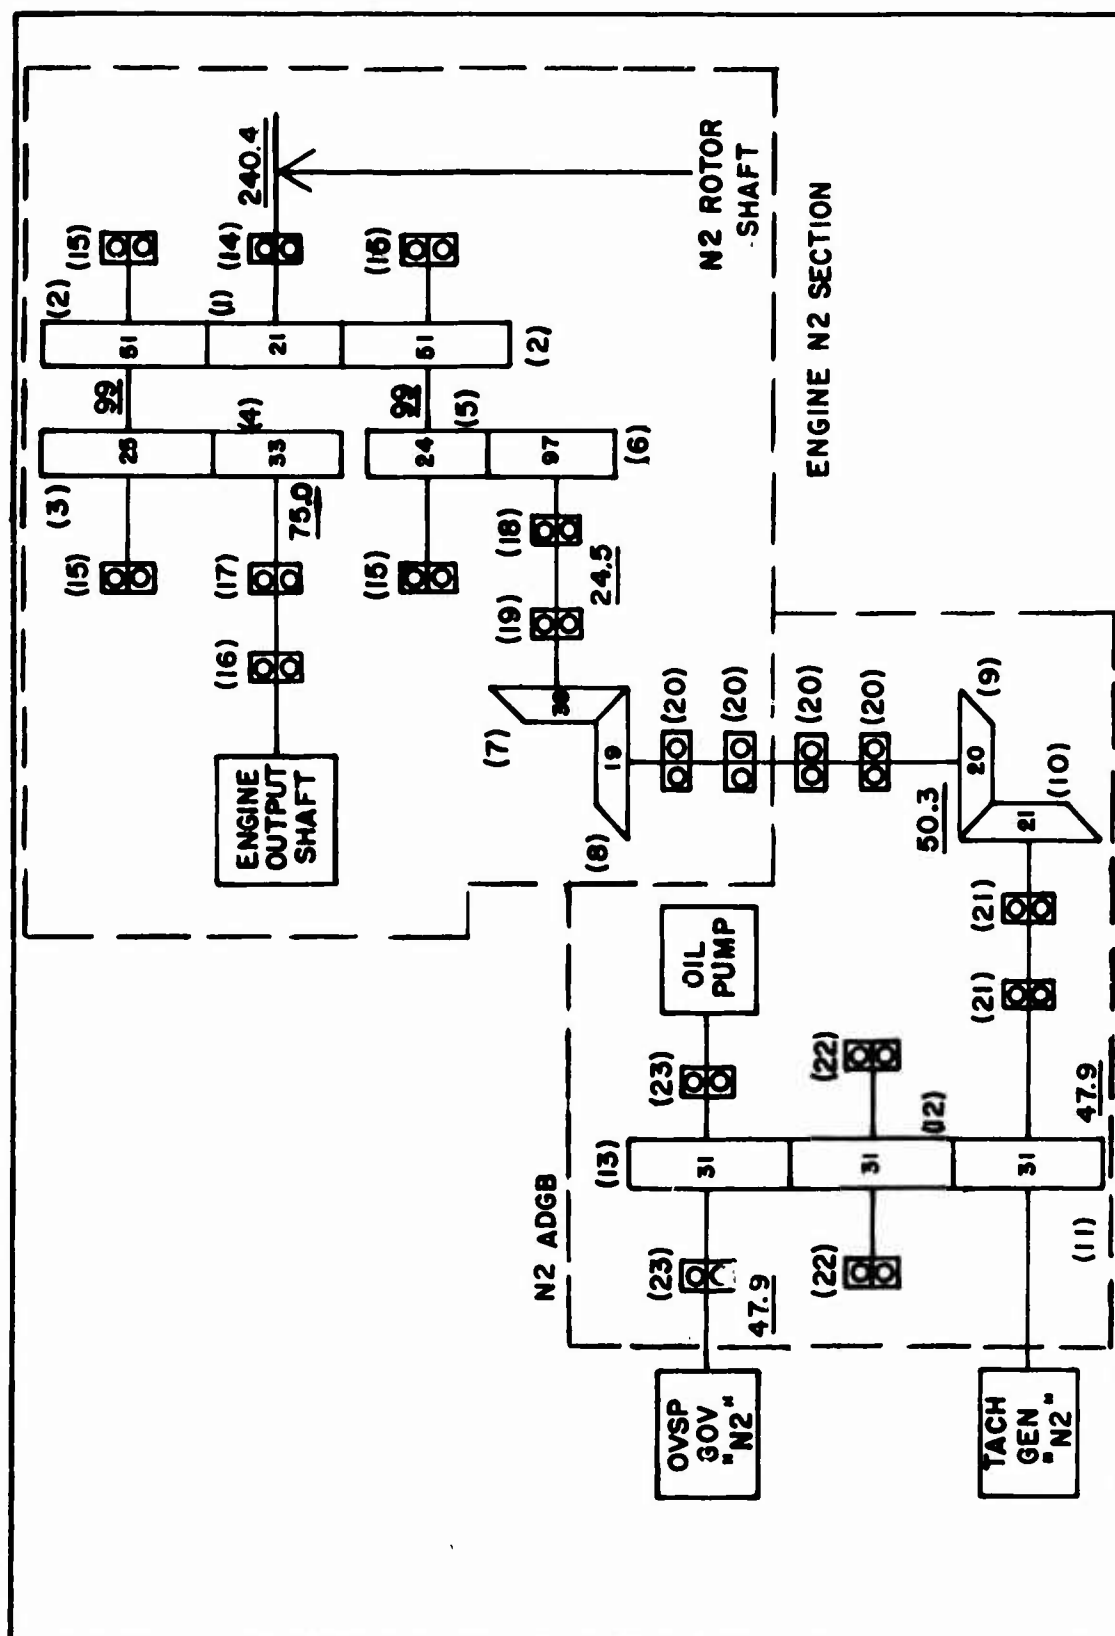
Gear Train Schematic - Models T53-L-9, T53-L-9A, and T53-L-11 Engines - Power Turbine Section (N₂).
